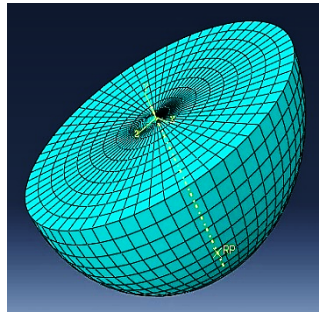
Tool with a 5 mm radius (designed as Shell Revolve - Rigid Body).
